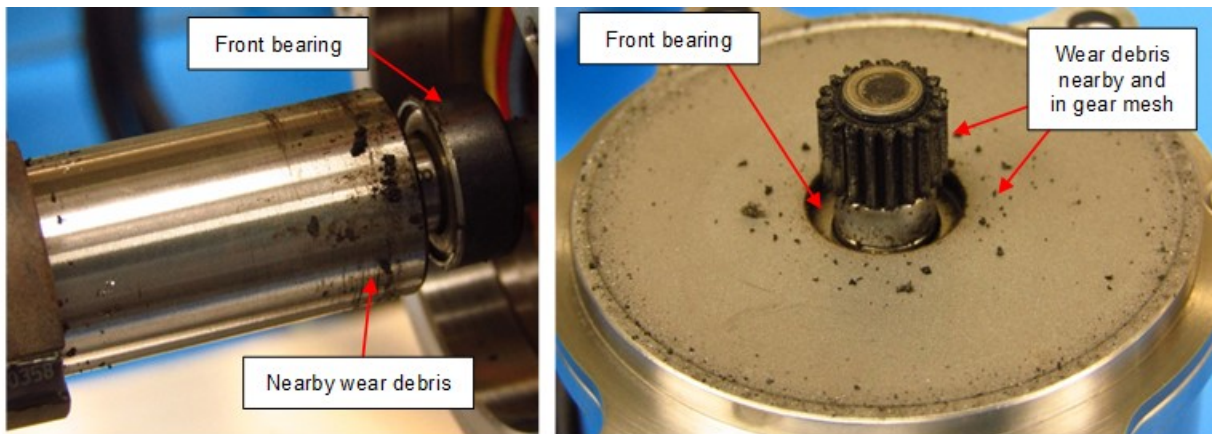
Wear Debris Surrounding the M45S Front Motor Bearing from ShEI DV Unit
